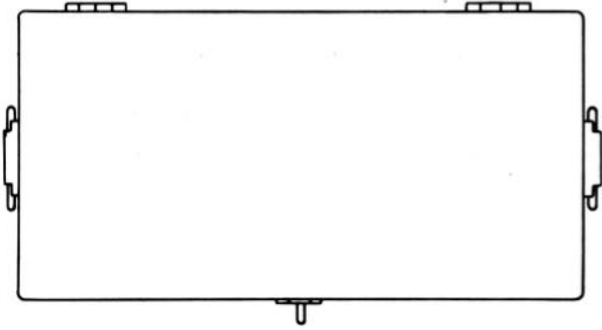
Outline Drawing—Relay Rack Mounting Brackets
